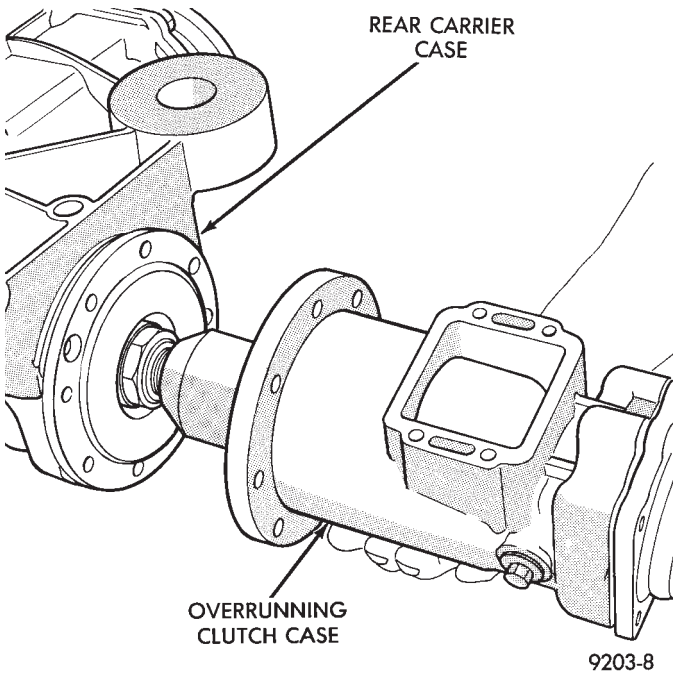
Separate Rear Carrier case from overrunning clutch case
